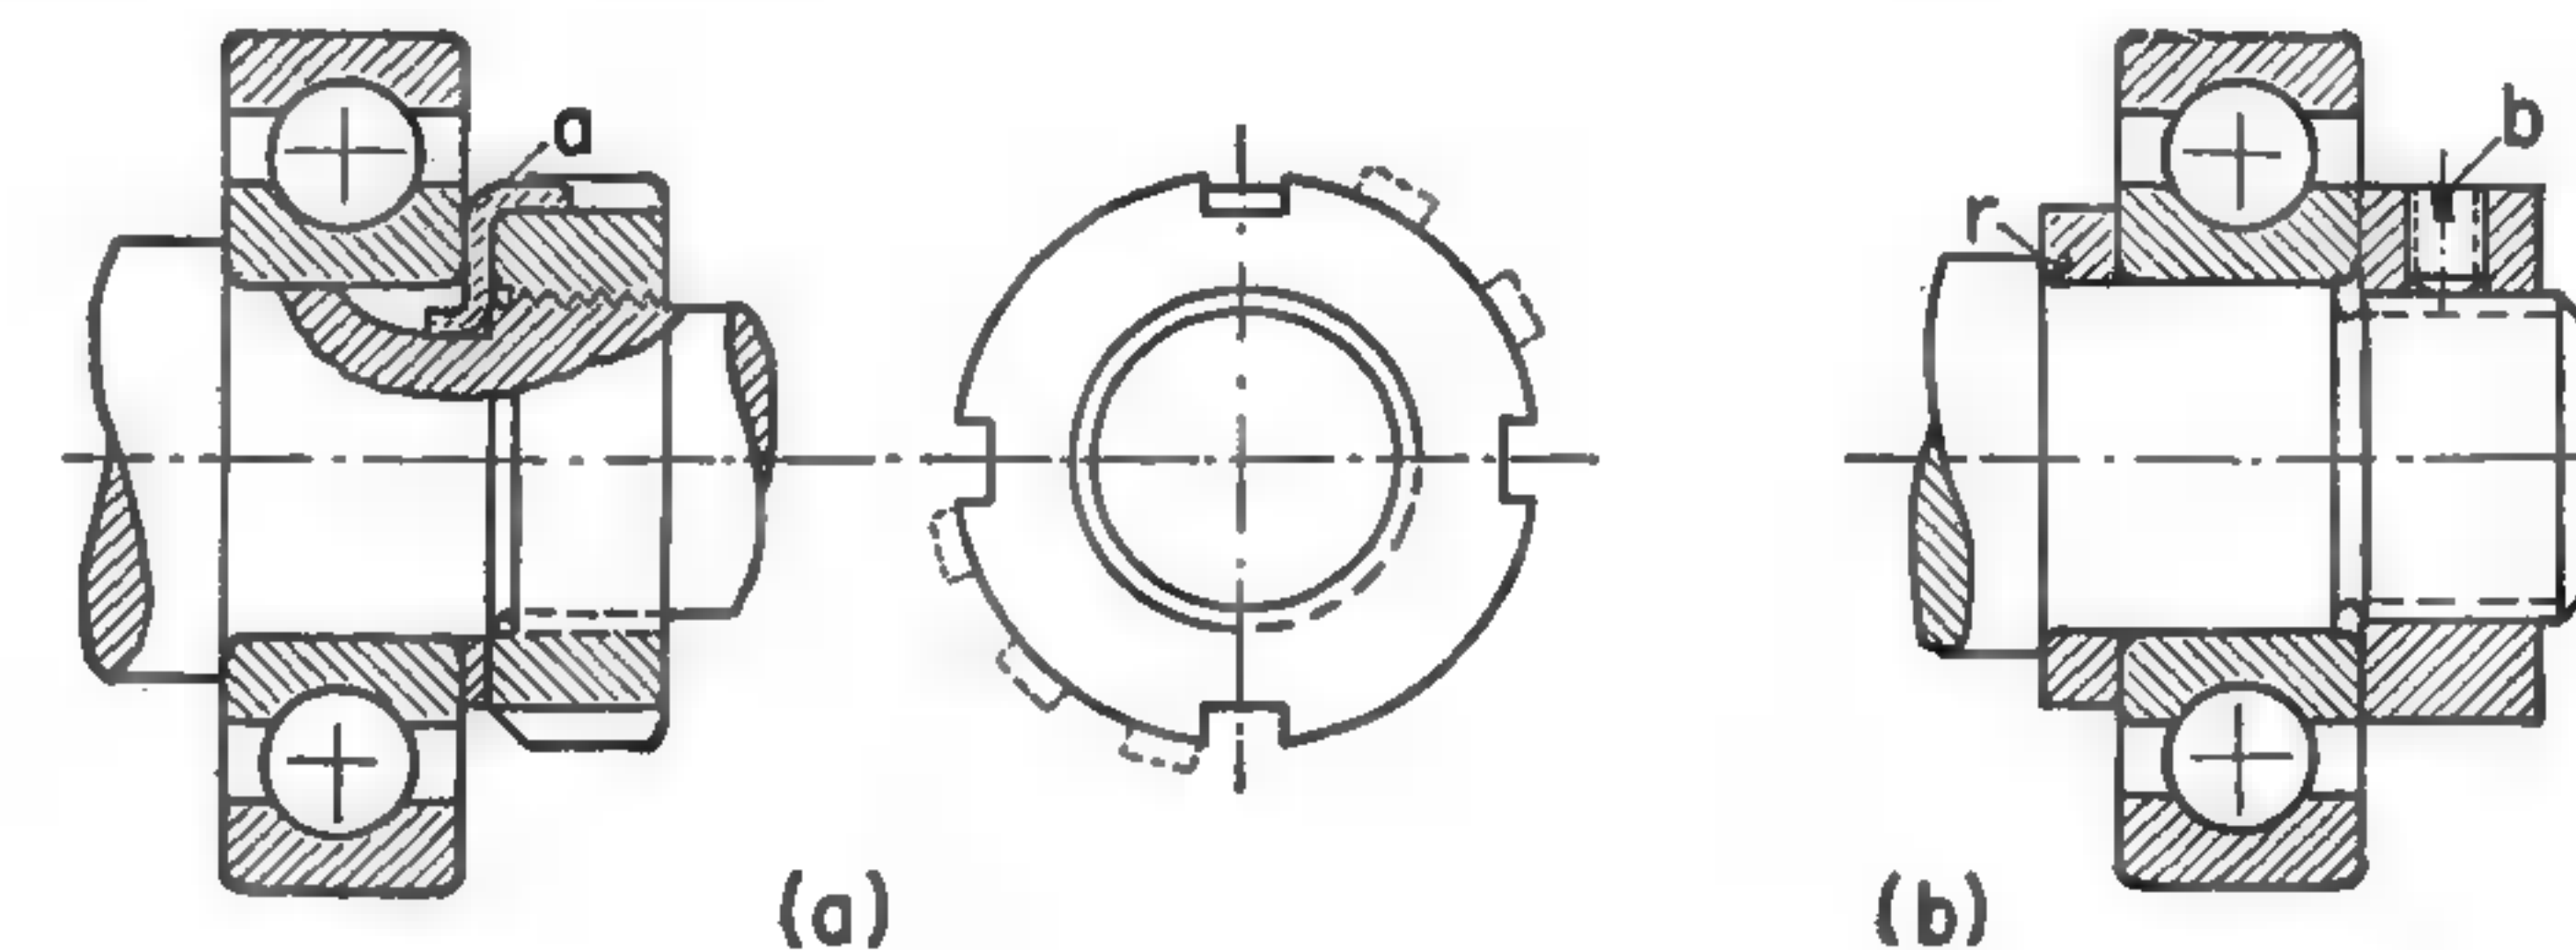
Methods of fastening ball bearings to a shaft.
